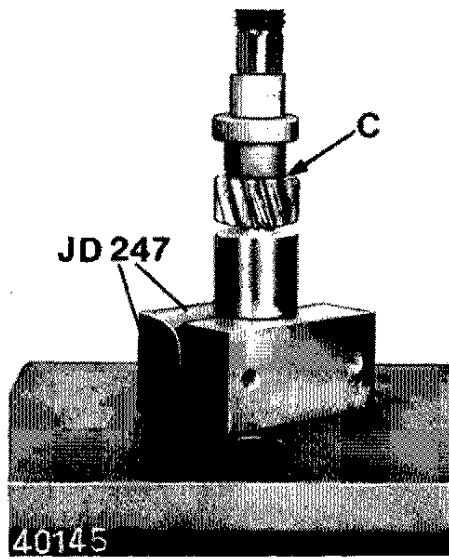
Pressing Gear on Balancer Shaft by means of Special Tool No. JD 247
